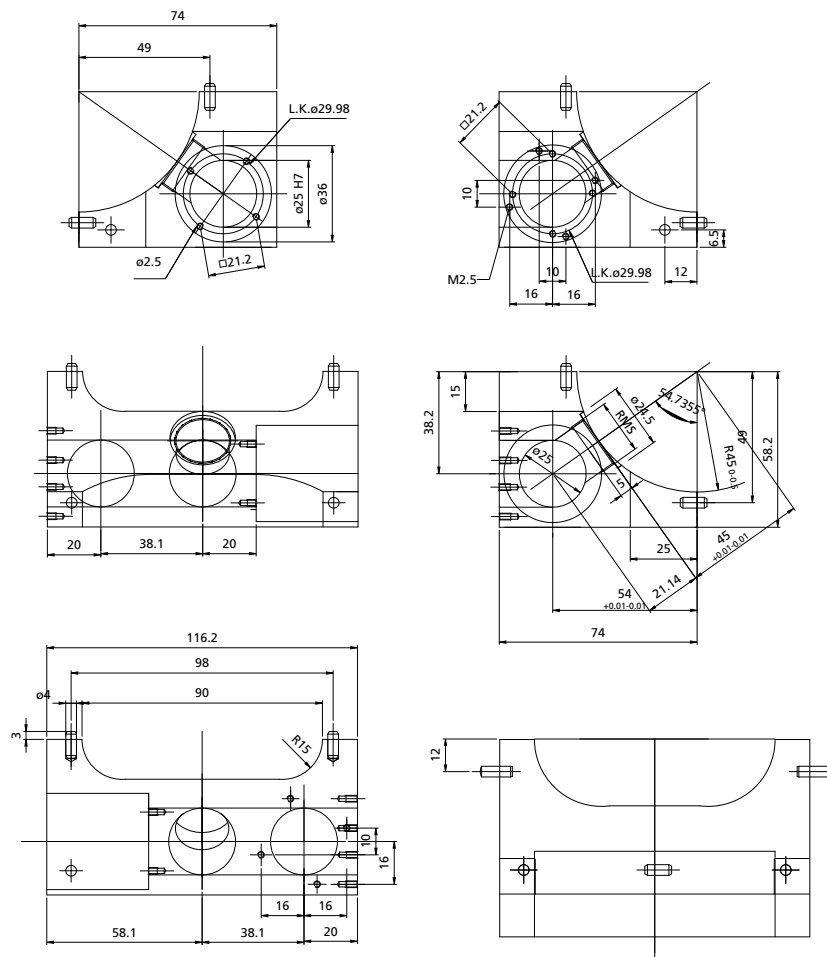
Drawings of the objective holder unit for the MIAM, dimensions in millimeters.
